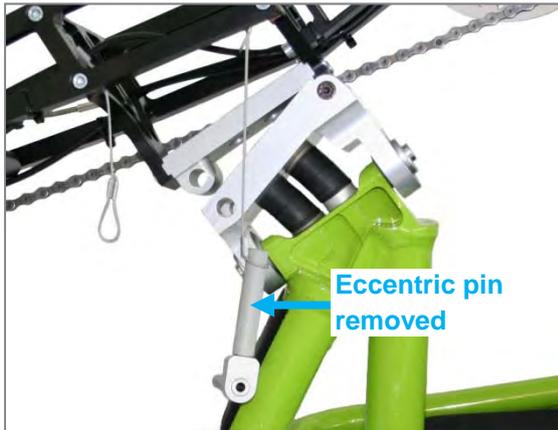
Eccentric pin removed from the adapter plate, chassis lowered to the ground
